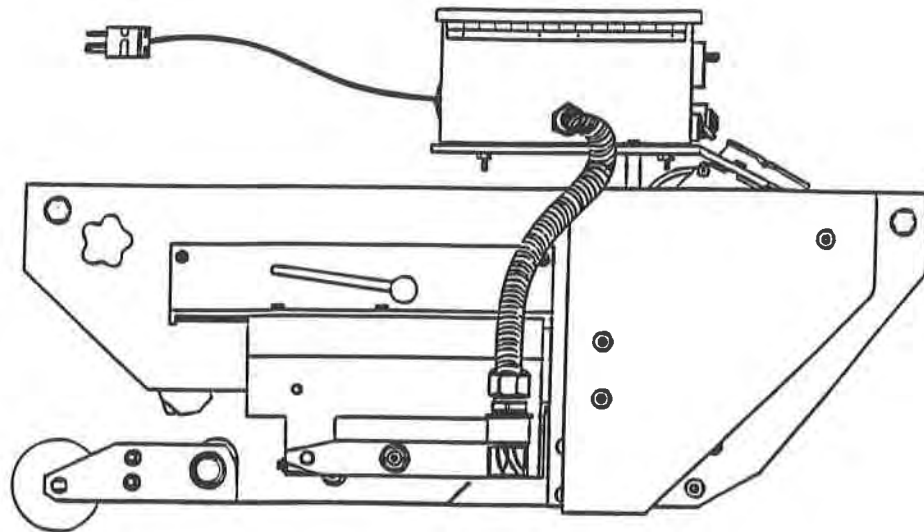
Typical Hot-Wedge Welding Apparatus
